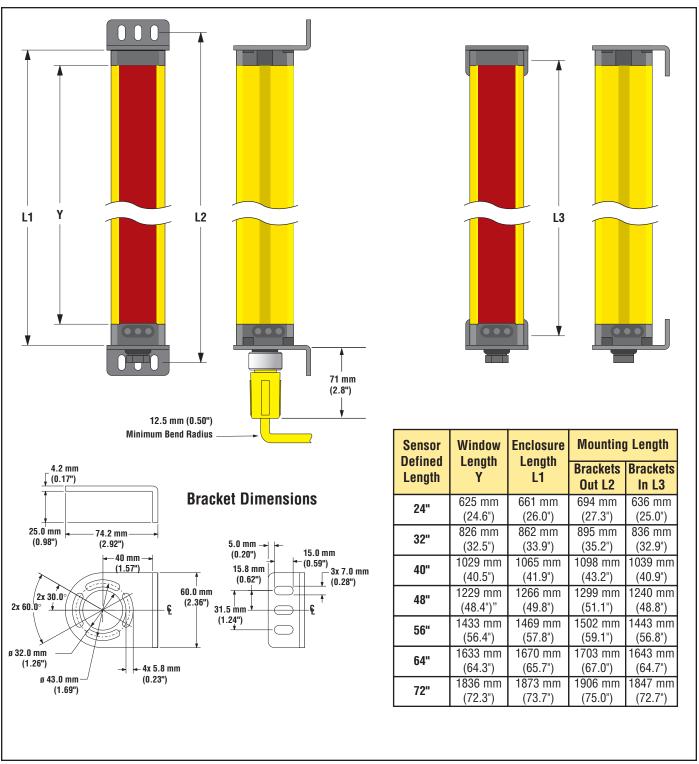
(s). Sensor dimensions (standard end-cap brackets shown) and EZA-MBK-1 mounting bracket dimensions
